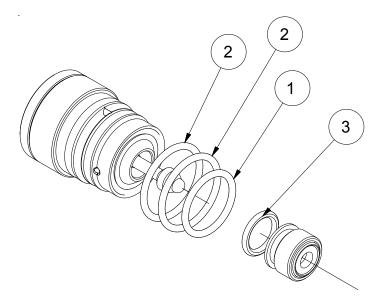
78949-00 Valve and 77367-00 Seat Replacement parts
